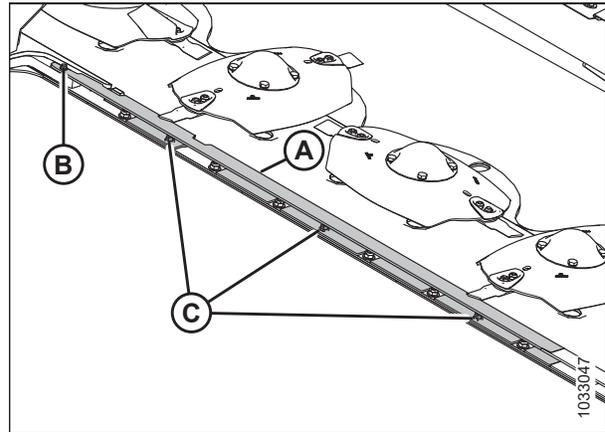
Left Cutterbar Deflector – Behind Cutterbar
